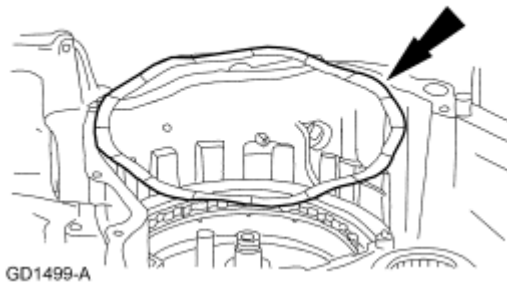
Thin Low/Reverse Clutch Wave Spring
